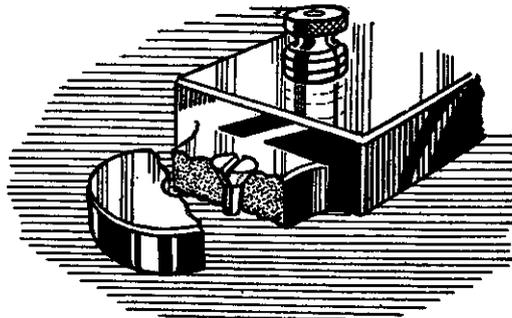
Use of the wrong screw will cause this! Don't use countersunk screws unless the lug hole is countersunk.
